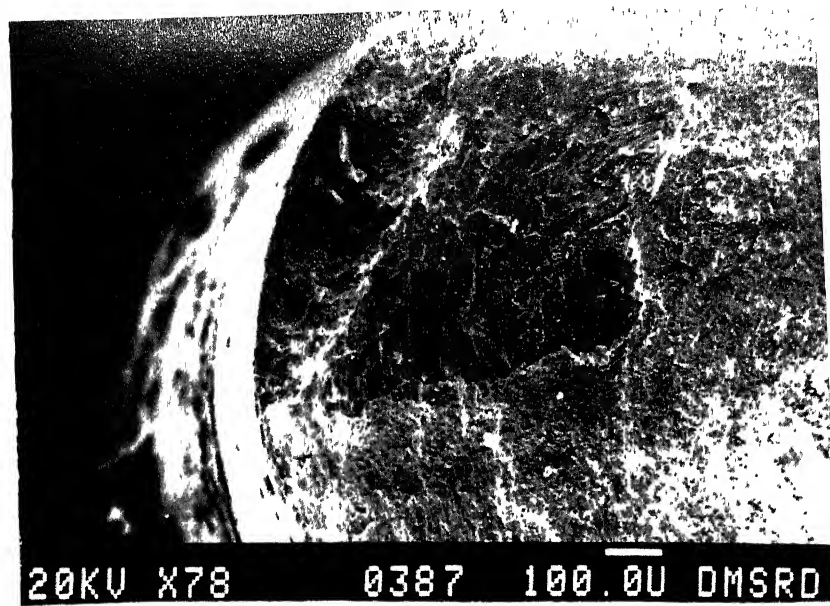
SEM photograph taken at an angle showing different fracture surfaces for a 2 mm steel wire.
